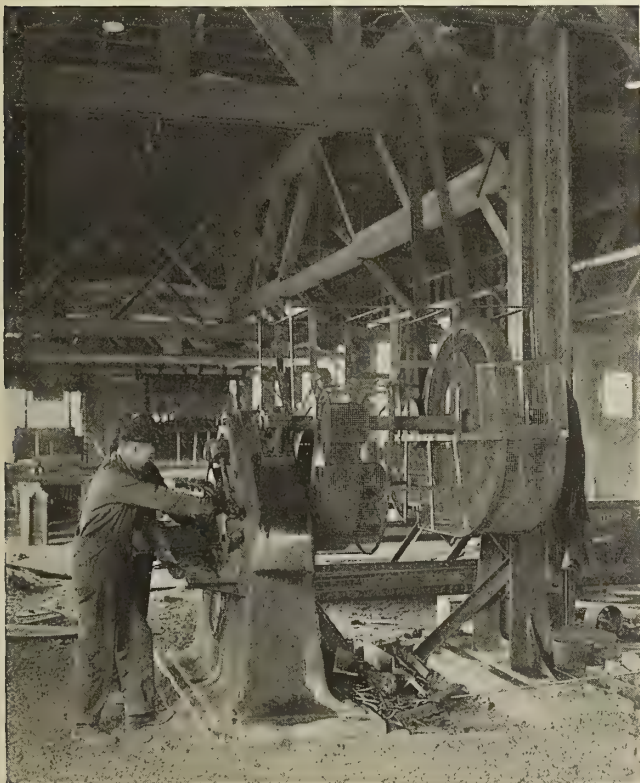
5-Horsepower Westinghouse Type CS Squirrel-Cage Motor Driving 6-Inch by 6-Inch by $\frac{3}{4}$ -Inch Hilles & Jones Angle Shears
